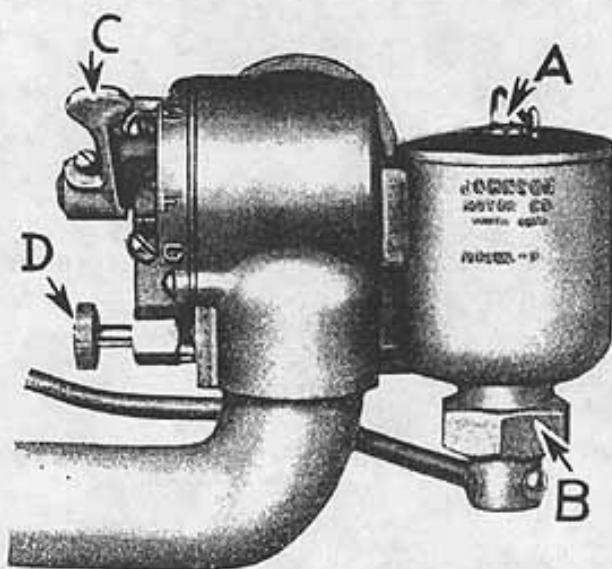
Front view of carburetor showing float pin, settling basin, gas throttle and needle valve.
